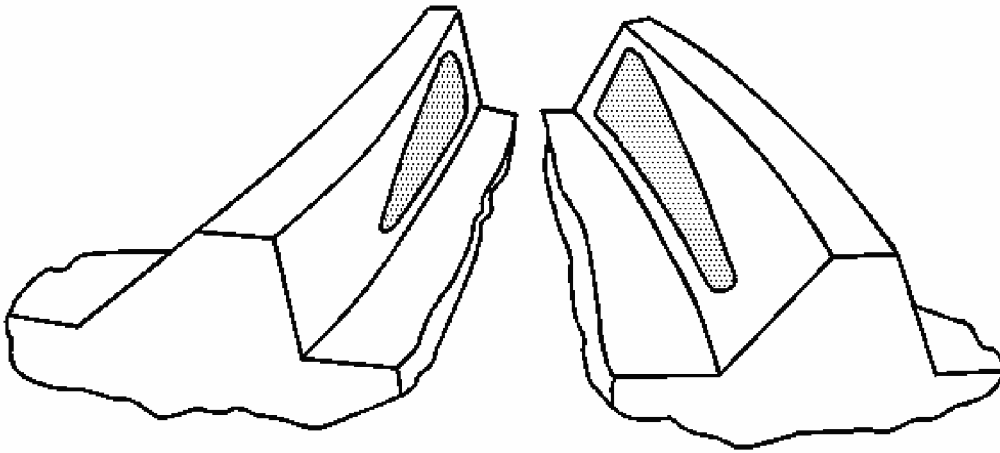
Identifying Drive Side Toe - Coast Side Toe Contact Pattern
